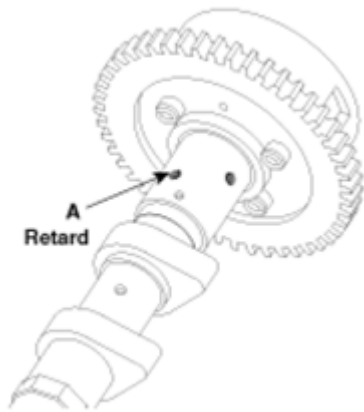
Identifying Retard Hole Of CVVT Assembly
